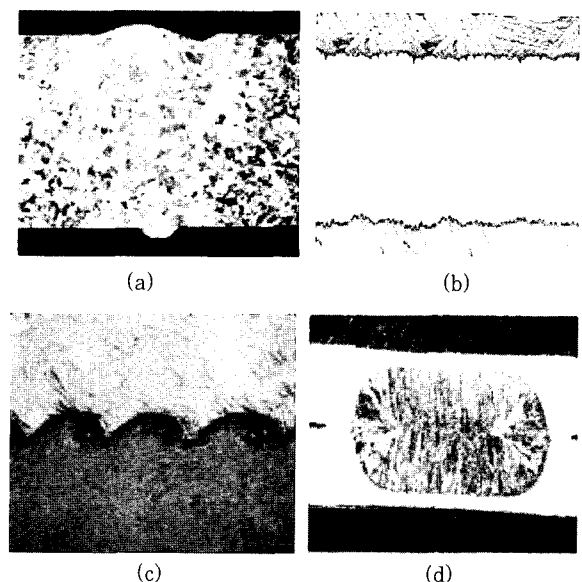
Weldment of various welding method (a) Electron beam welding (b) Brazing (c) Explosive welding (d) Spot welding
